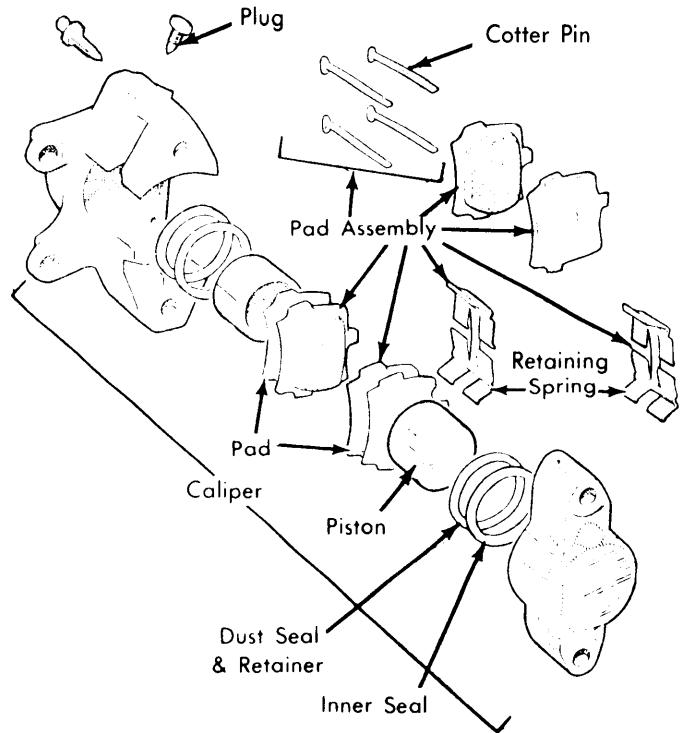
Exploded View of Front Disc Brake Caliper Assembly
